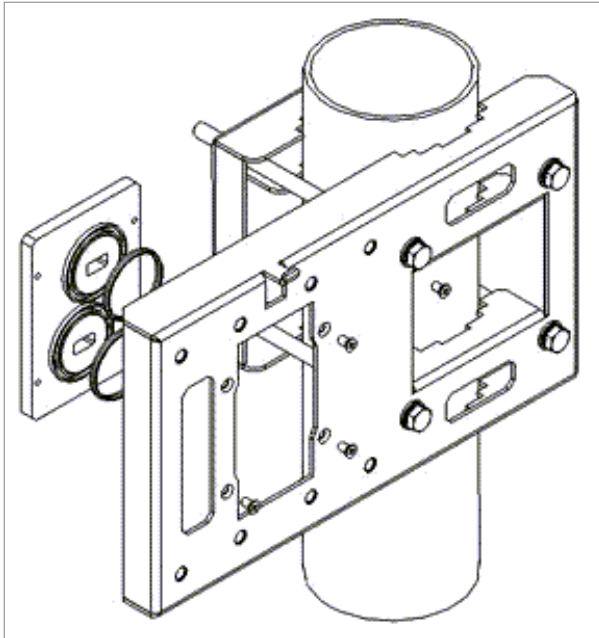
Remote Pole Mount Kit – 4-5 GHz
